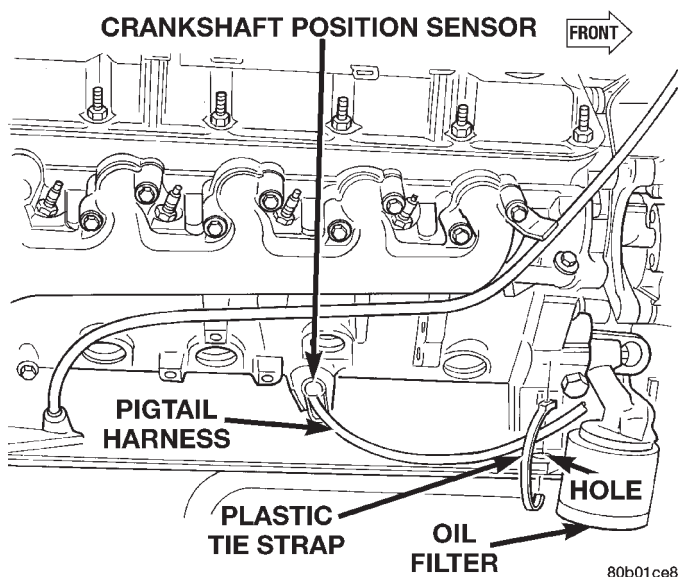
Crankshaft Position Sensor Location—8.0L V-10 Engine
